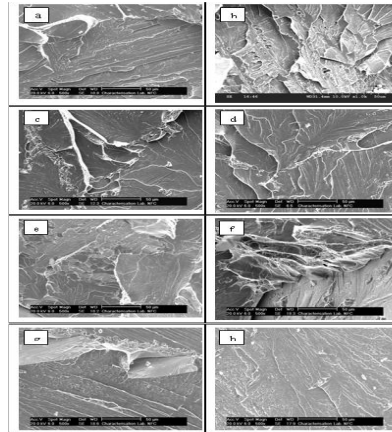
Fractographs of tensile (a, b, c, d) and impact specimens (e, f, g, h) of ferritic stainless steel weldments in as-welded condition
